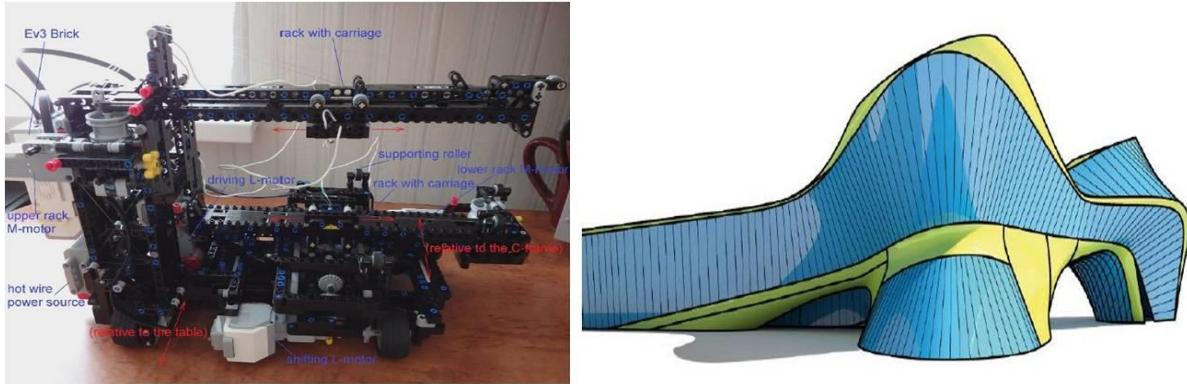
Four-Axis of CNC Machine 3b) Complex Design
